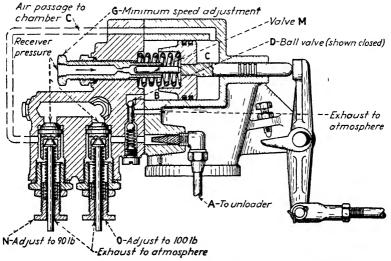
Unloading regulator that operates intake valve (Fig. 104) and controls engine speed.
